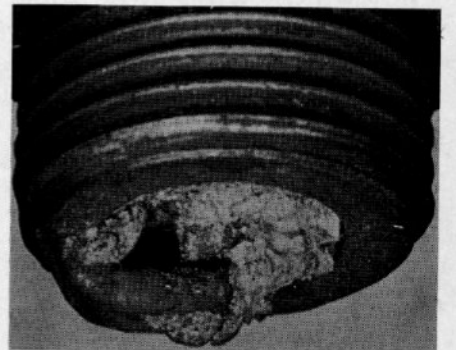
Gray metallic aluminum deposits on plug. (Seldom encountered.) Piston damage due to pre-ignition. Overhaul engine and determine cause of pre-ignition.
